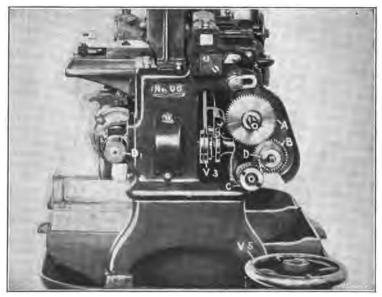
End View of No. 00 Machine showing Arrangement of Change Gears
